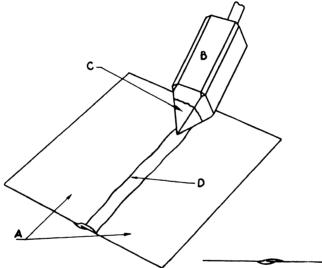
Soldering with a soldering copper: A. Base metal, B. Soldering copper, C. Tinning on soldering copper, D. Soldered seam
